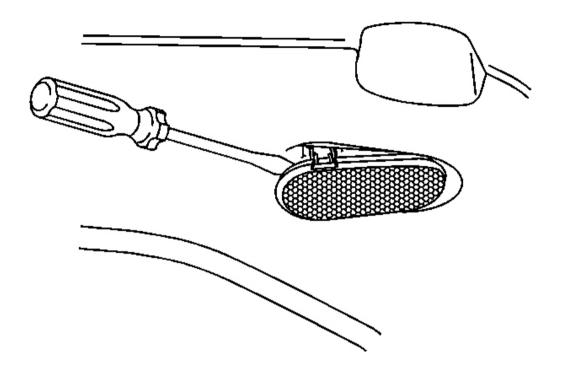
View Of Liftgate Lamp Courtesy of GENERAL MOTORS CORP.
